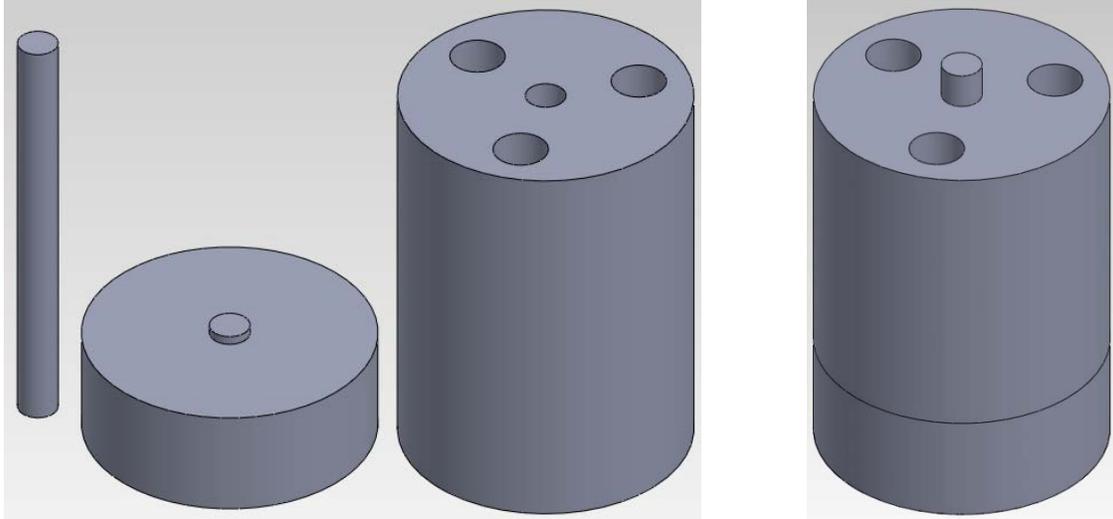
Solidworks design of the die components (left) and the assembled die (right)
